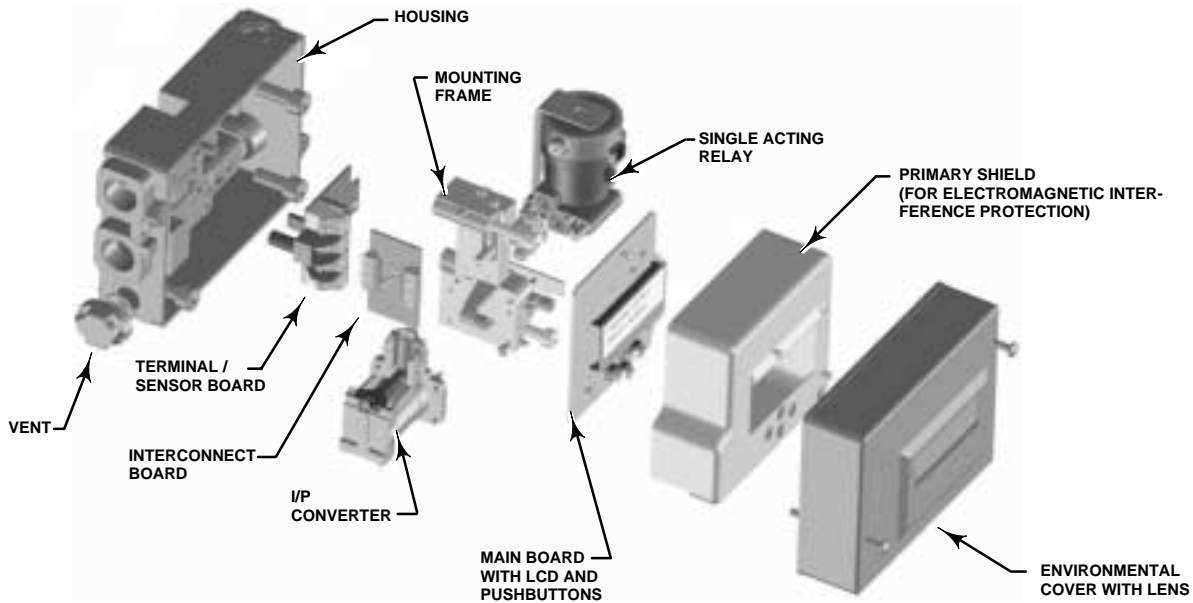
DVC2000 Series Digital Valve Controller Assembly (Exploded View)
